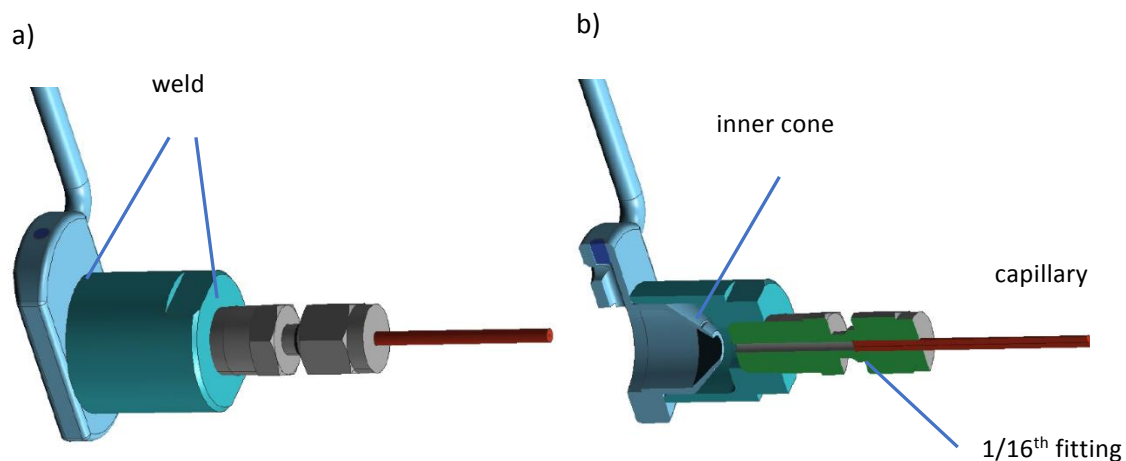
3D CAD drawings of the modified sample cone with connection to capillary and 1/16th inch fitting, (a) outer view and (b) cross section revealing standard ESI inner cone
